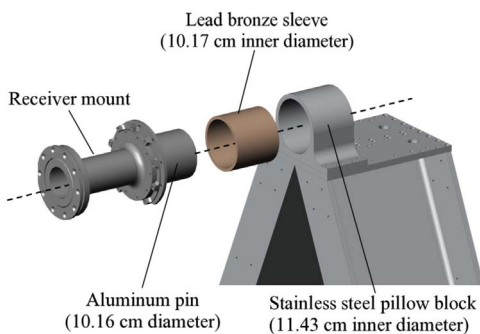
Exploded view of one of the two trunnion bearing mounts that supported the inner frame relative to the outer frame. The bronze sleeve was press fit into a stainless steel pillow block. The materials and diameters were chosen to ensure low friction under the broad range of temperatures encountered during payload ascent and flight.
